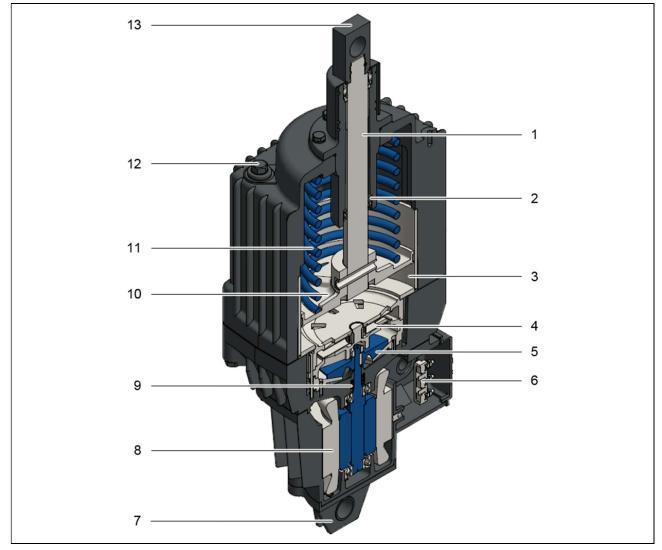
ELDRO[®] thruster layout (example: Ed 121 – Ed 301 C-HS)
